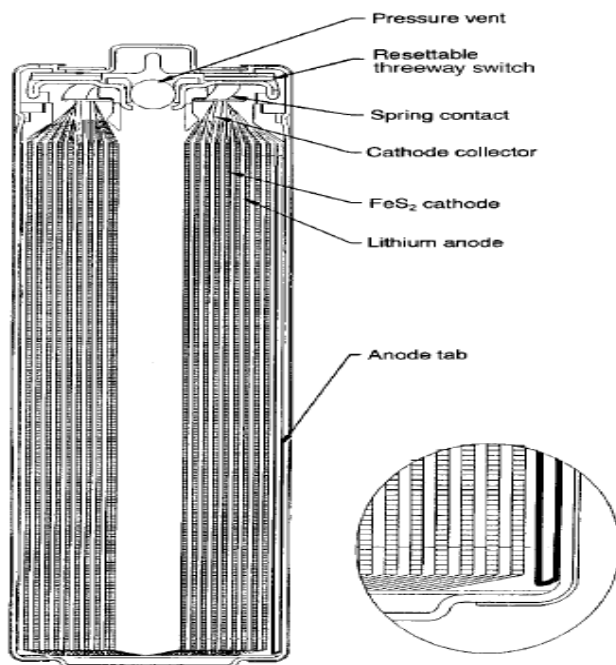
Cross section and top assembly of Li /FeS₂ AA-size battery. (Courtesy of Eveready Battery Co., Inc.)
